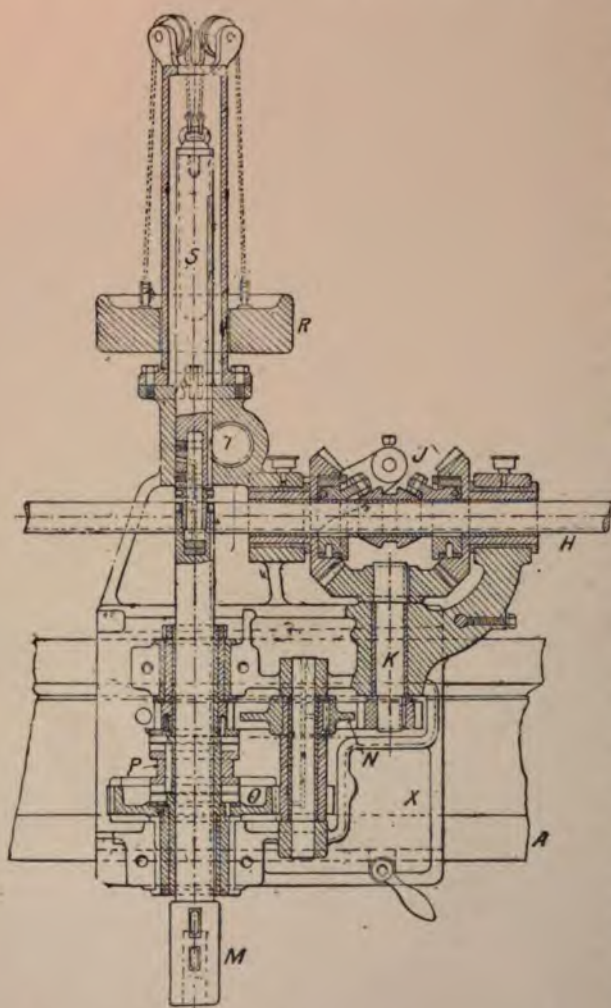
Radial Drilling Machine. (Enlarged Section.)
